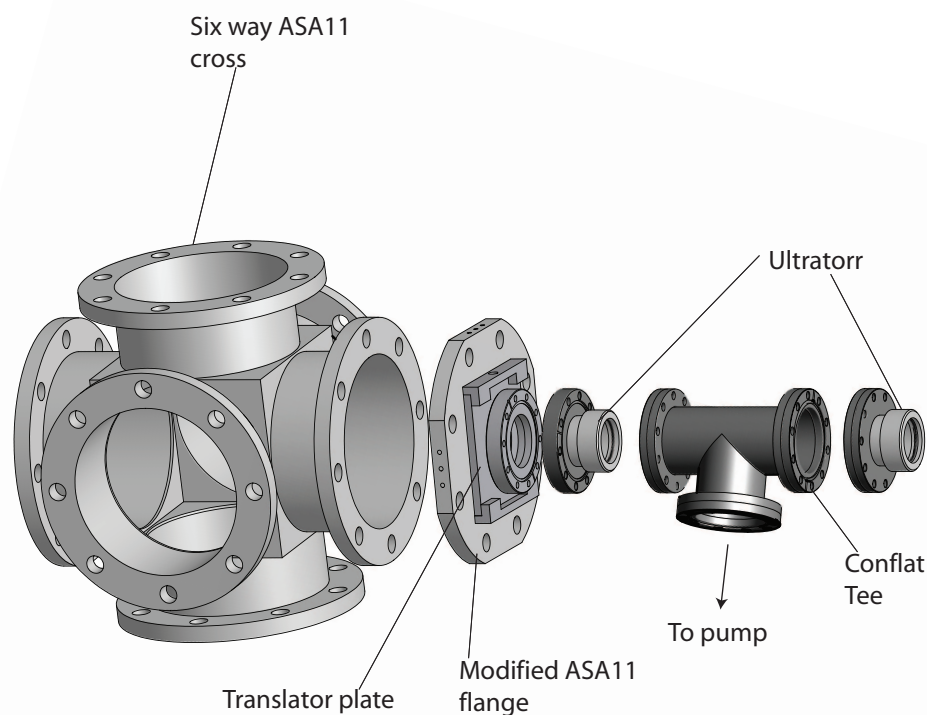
Exploded view of part of the molecular beam source assembly. The manipulator tube slides through the ultratorr fittings to move the pulsed valve into the correct Z-position; the pulsed valve assembly moves from inside the ASA cross to within the main vacuum chamber. To align the pulsed valve with the cell aperture, the translator plate slides parallel to the modified ASA-11 flange. The volume defined by the outer surface of the manipulator rod, the ultratorr fittings and the conflat tee is evacuated by a pump so that translation of the manipulator tube does not introduce gas into the vacuum chamber.
